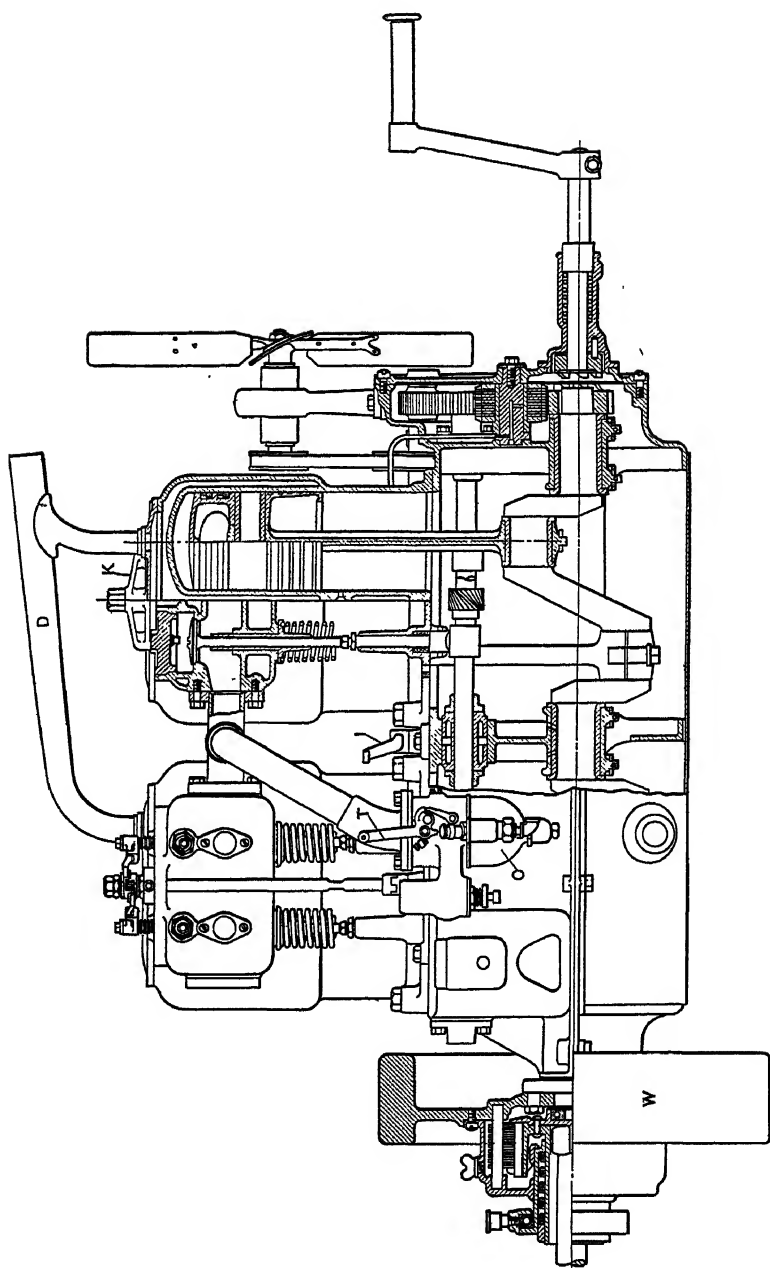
Automobile Engine. Elevation and Longitudinal Section.
